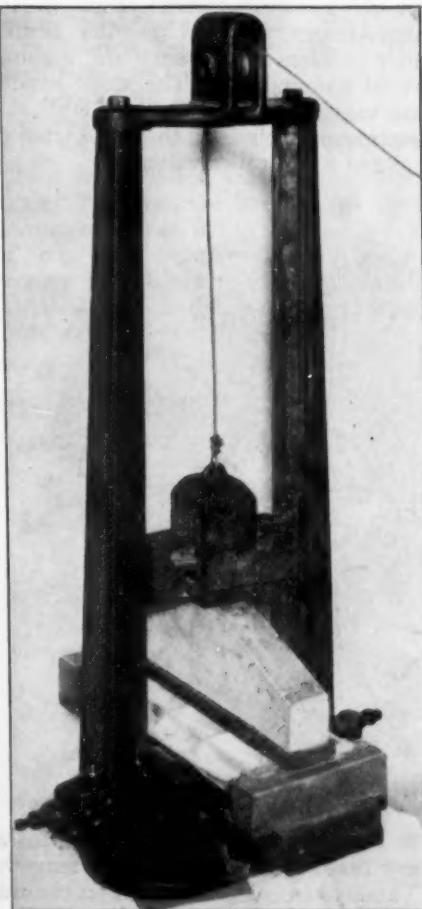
RAMMING APPARATUS FOR COMPRESSING SAND IN MOLD BOX
